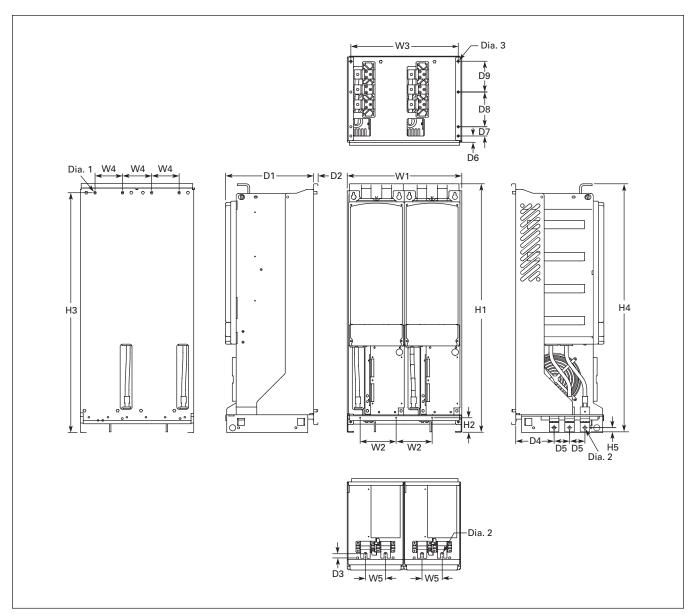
SPX9000 Dimensions, FR13 Open Chassis Converter
